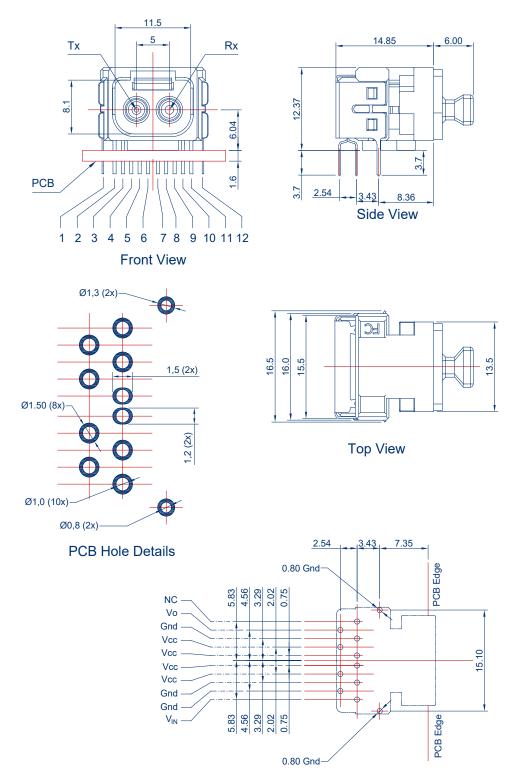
Mechanical dimensions of the product, and PCB footprint, which is a top view General dimensional tolerance is  $\pm$  0.2 mm
